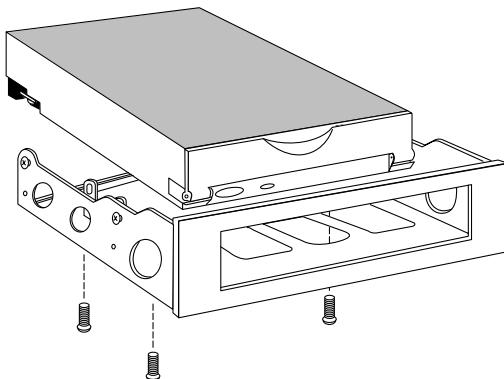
Removing the Mounting Boot and Three Screws (front view)
